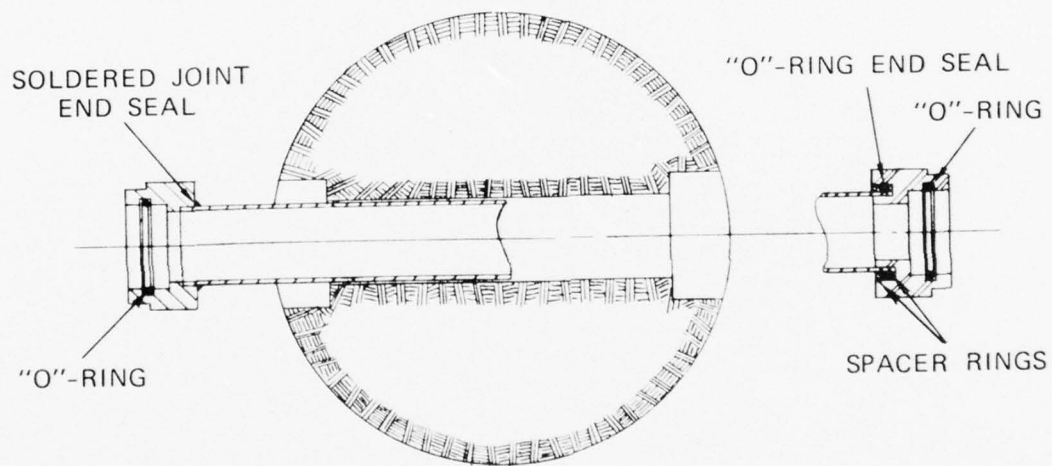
SPECIMEN LINER ASSEMBLY
